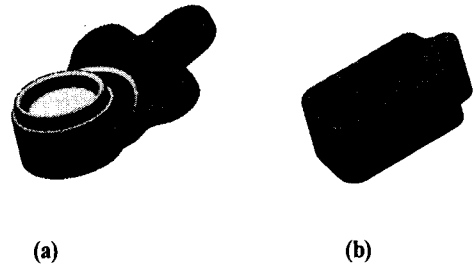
(a) Forged shape of the socket forging (b) Previous shape of preform
